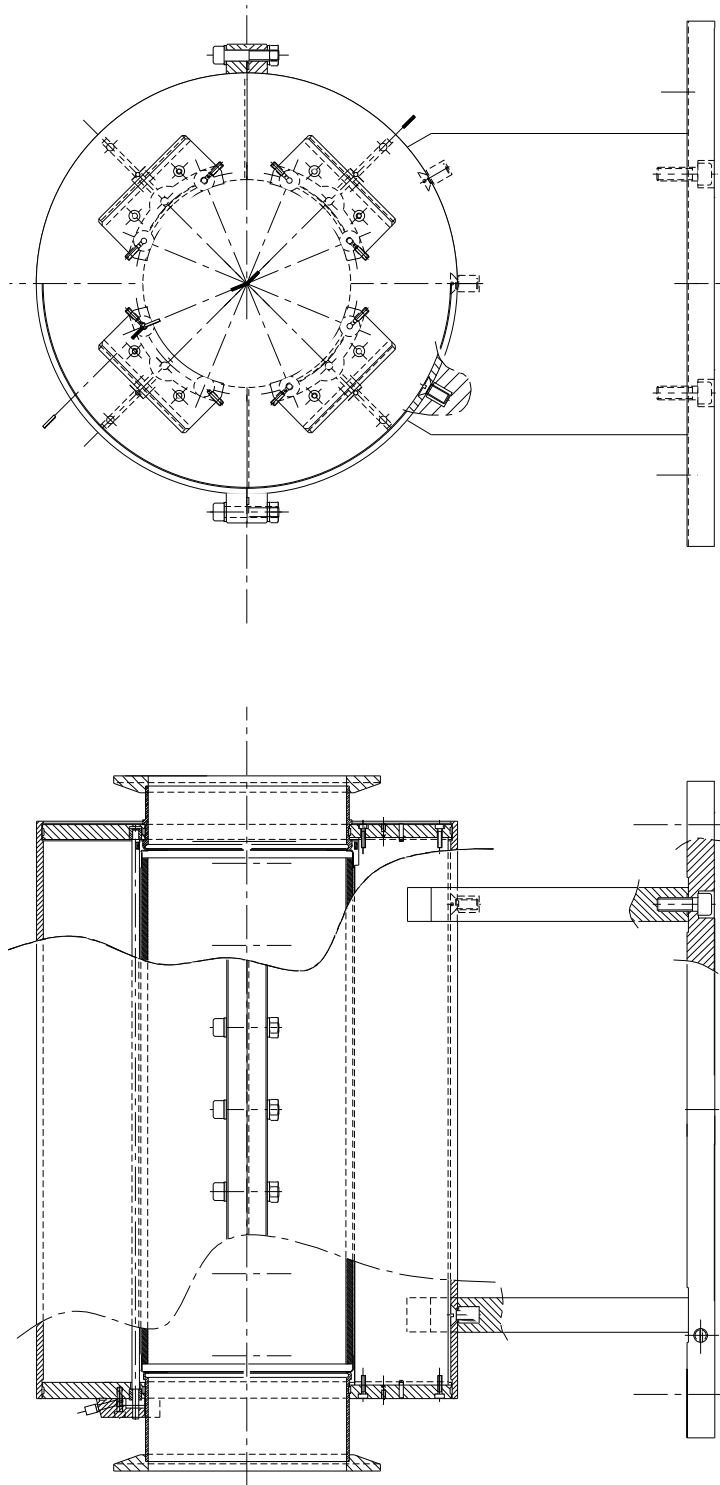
CAD drawing of the final pick-up design. The total length is 500 mm and the outer radius 300 mm.
